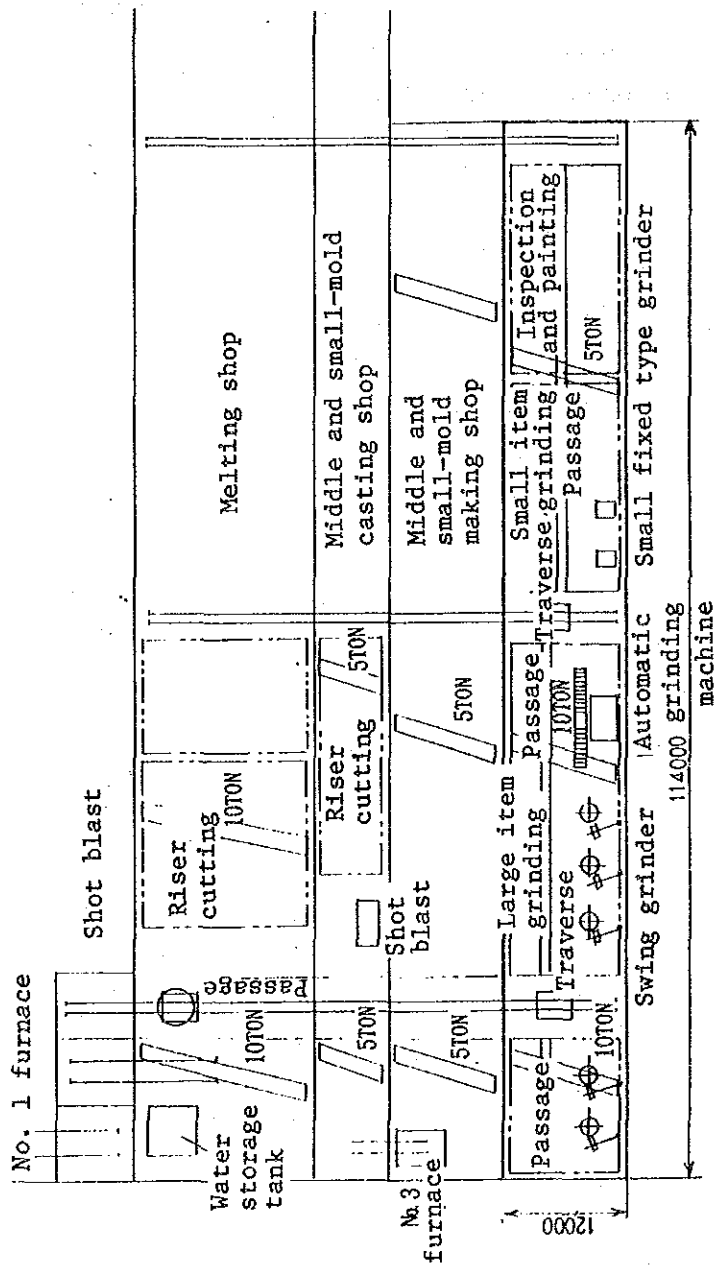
Finishing Shop Machine Layout Plan
